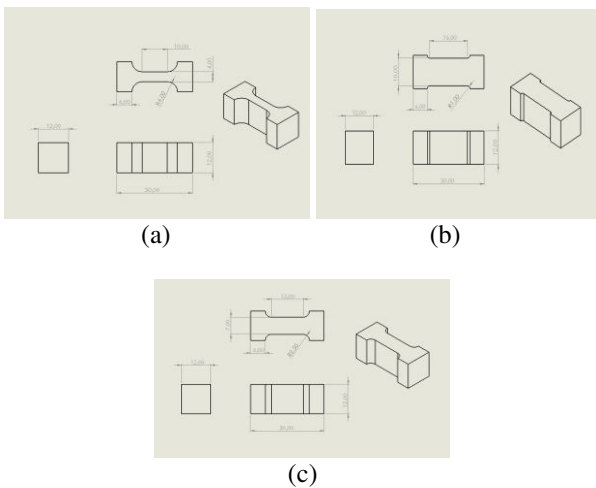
Dimension of the specimens a) 4 mm radius specimen, b) 1 mm radius specimen, c) 2.5 mm radius specimen. Source: Authors.
